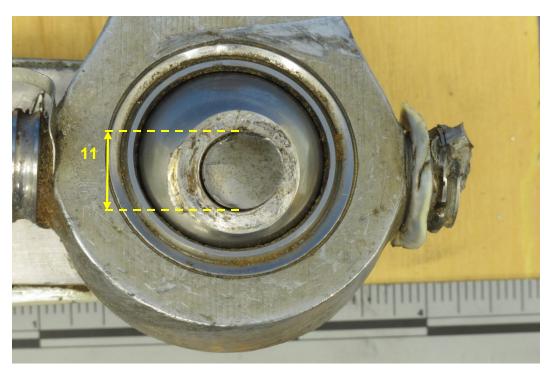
The fractured bolt attaching the rod end bearing of the actuator piston to the collective lever arm assembly. The measured dimension is listed in Table 1.
